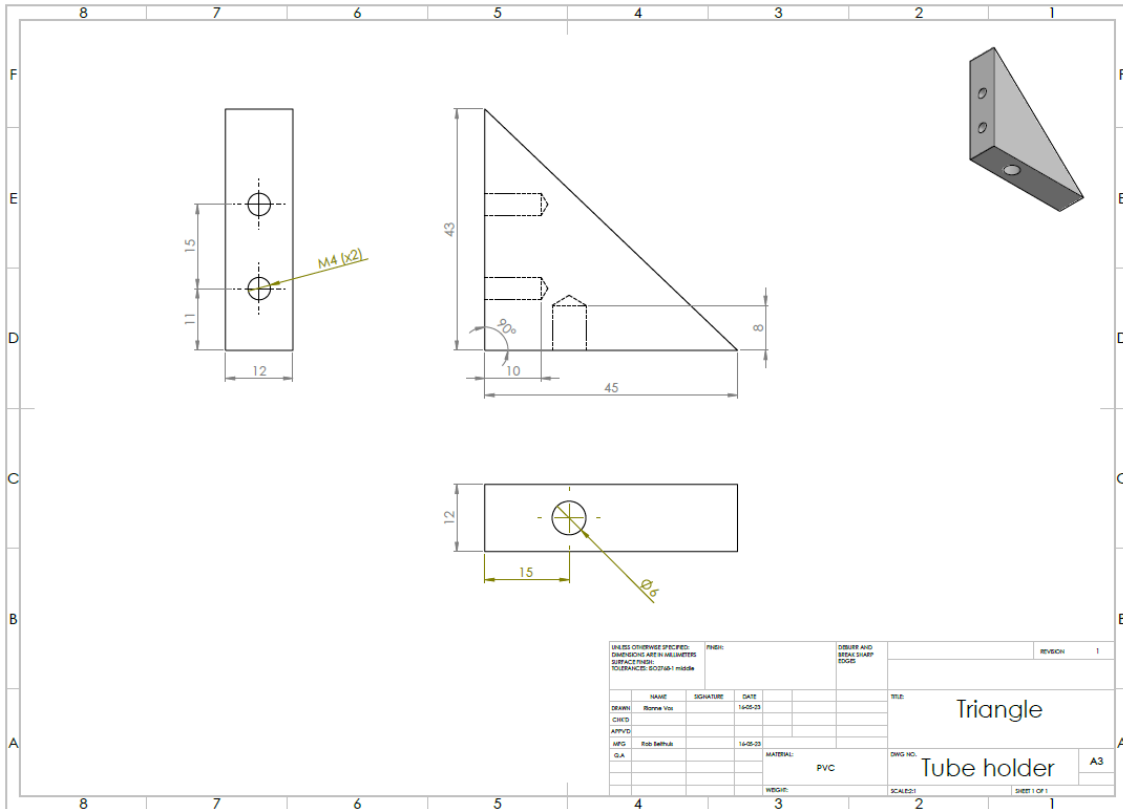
Drawing of triangles created in SolidWorks with dimensions in millimeters (mm). The drawing serves as reference for the sawing, milling, and drilling production process.
